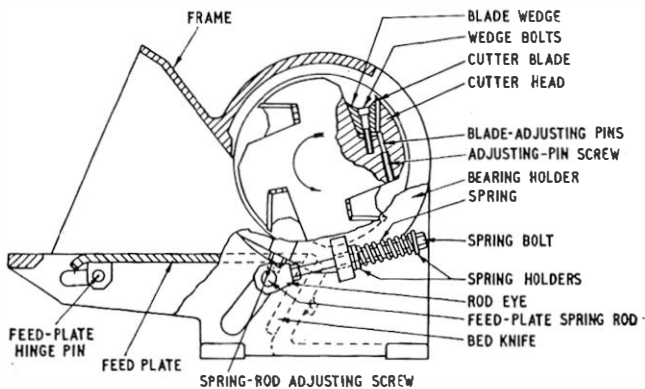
CROSS-SECTIONAL DRAWING OF CHIPPER
